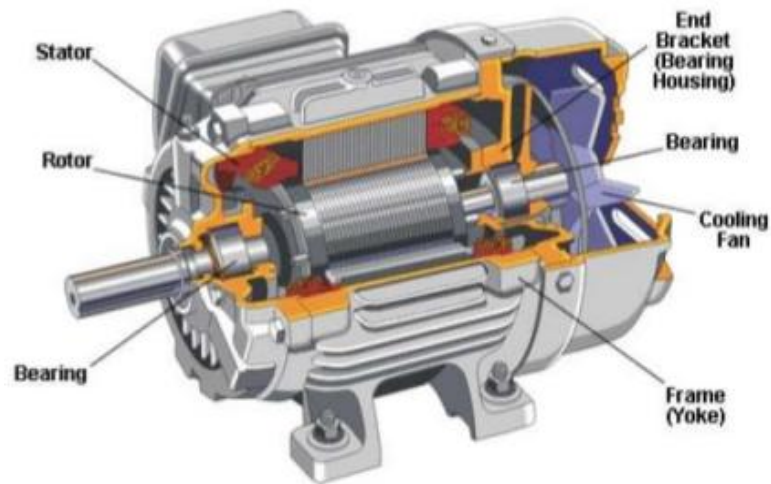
Parts of an AC motor (Electrical Engineering 123, 2016)
